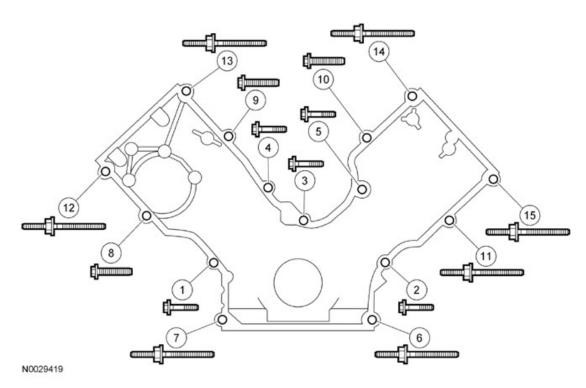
Installing Engine Front Cover With Engine Front Cover Gasket Courtesy of FORD MOTOR CO.
